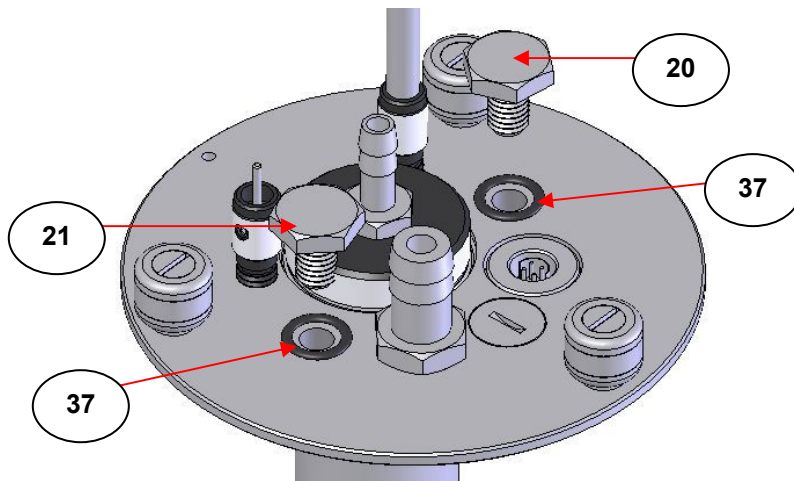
Removal of Blanking Plugs for VT Cell Flow Fitting Kit Use
